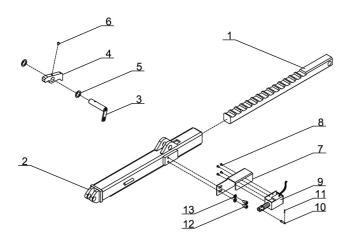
Spare parts drawing 6 - FHT-B 1200
